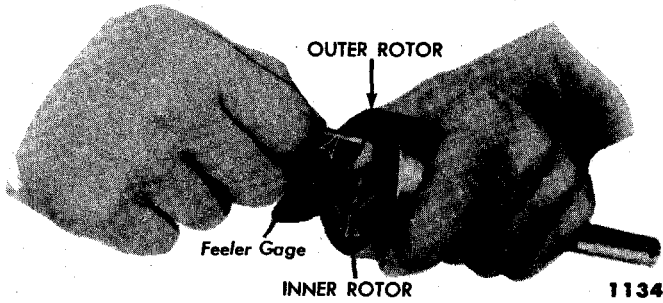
Measuring Clearance Between Oil Pump Rotors 1134
